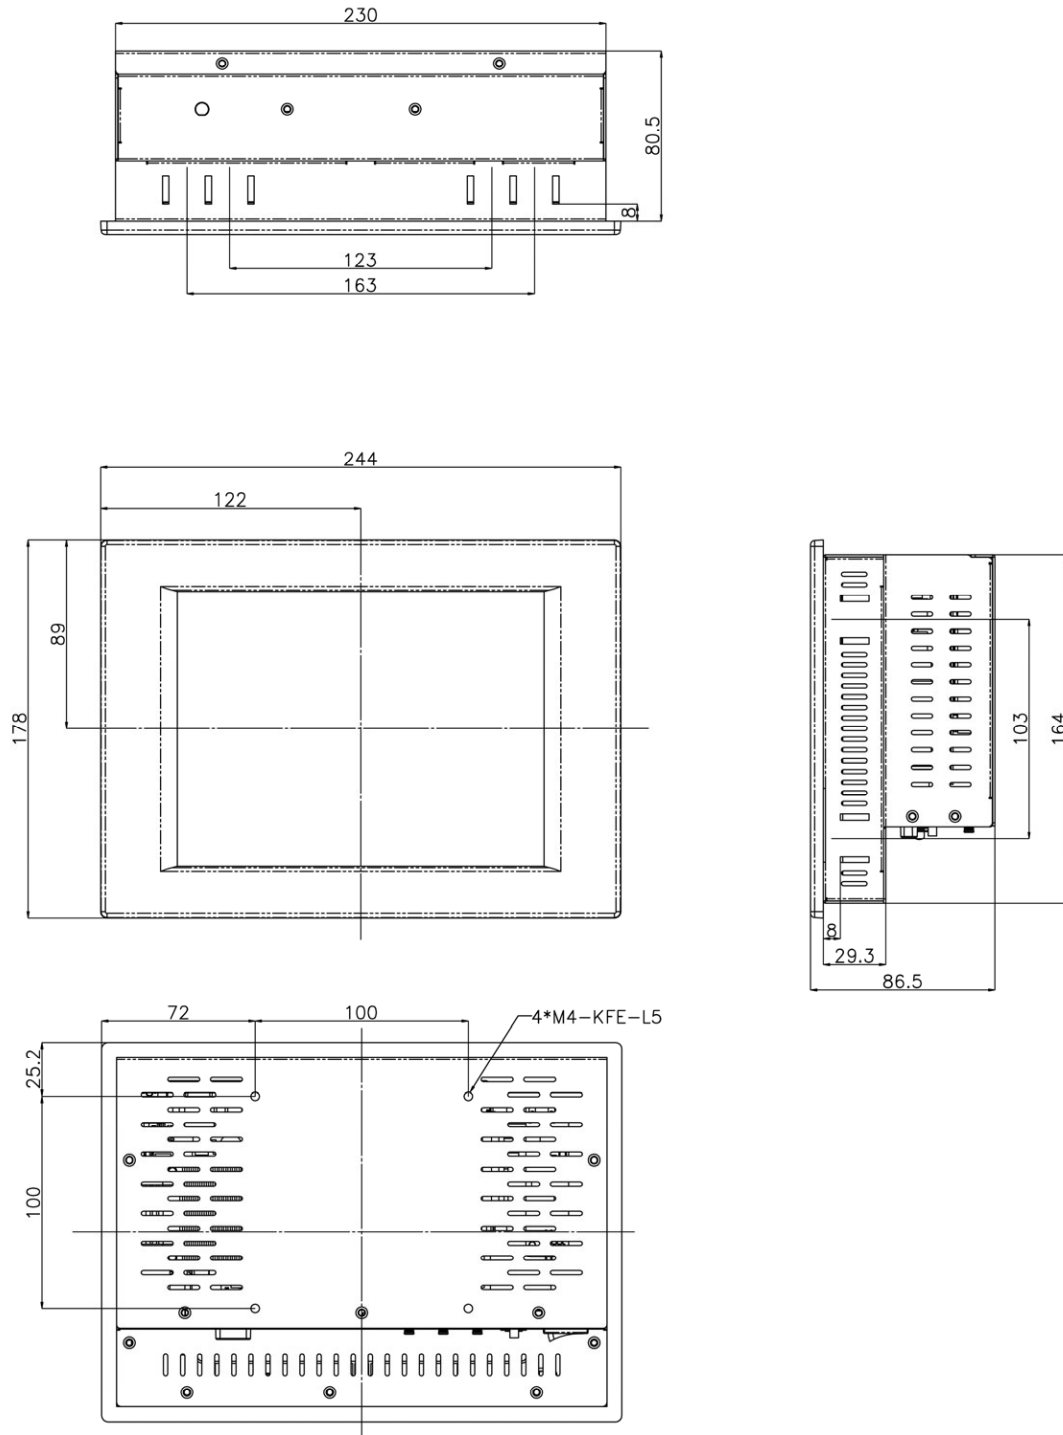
PPC-3708A-N26 Dimensions (mm)
